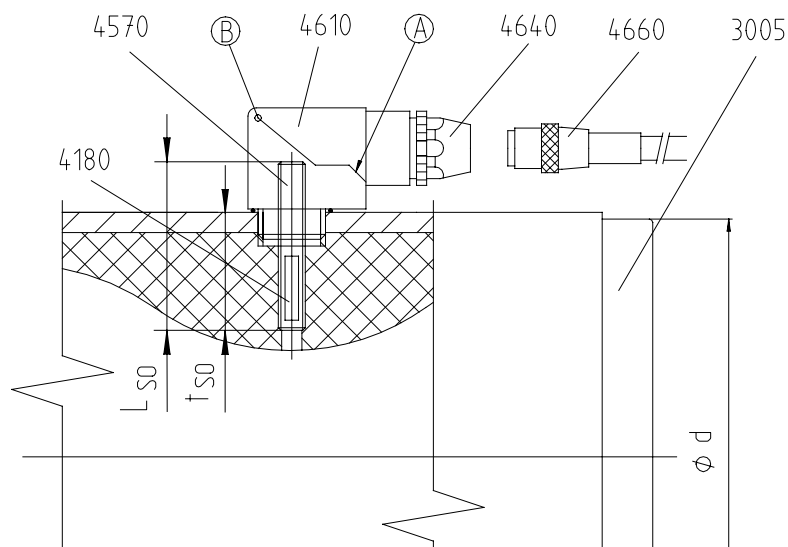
Installation temperature sensor in $d \geq 86$ mm diameter stators acc. to table 1
